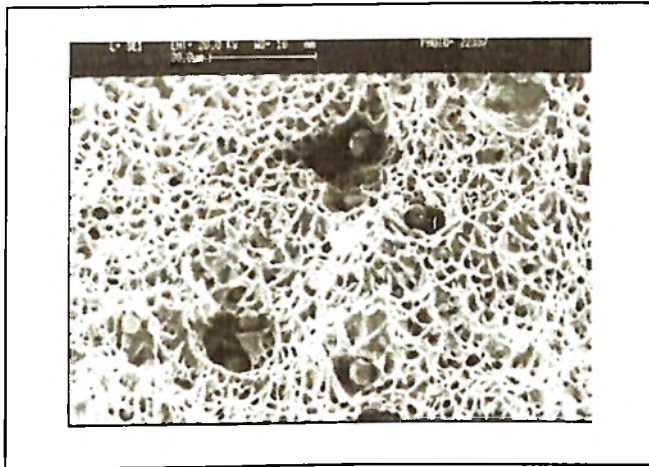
Scanning electron micrograph of the fractured tensile sample of weld metal deposited with pure slag
